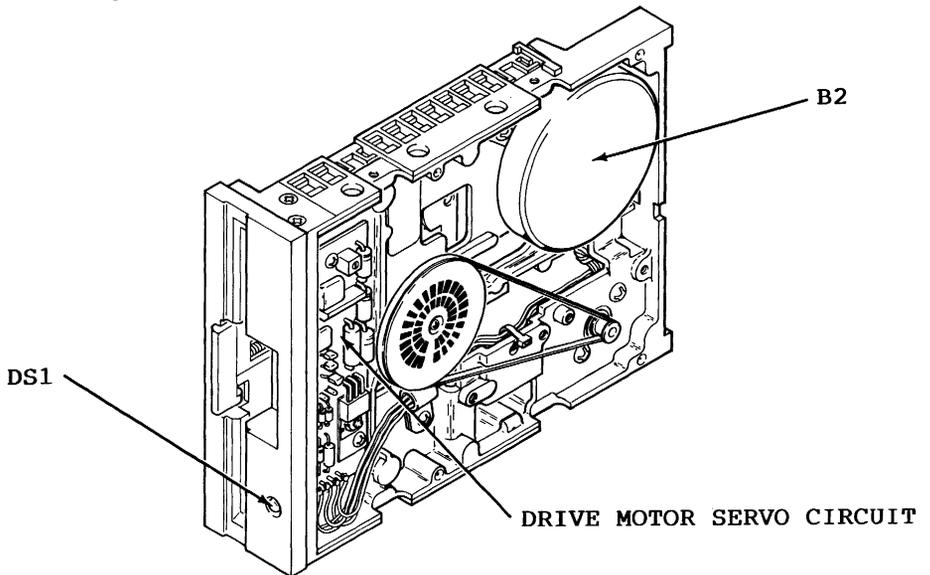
Drive Unit, Parts Layout (Bottom)
